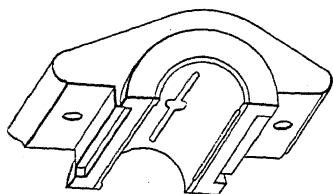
Bearing cap, illustrating longitudinal groove through oil inlet. (Courtesy Vacuum Oil Company.)
